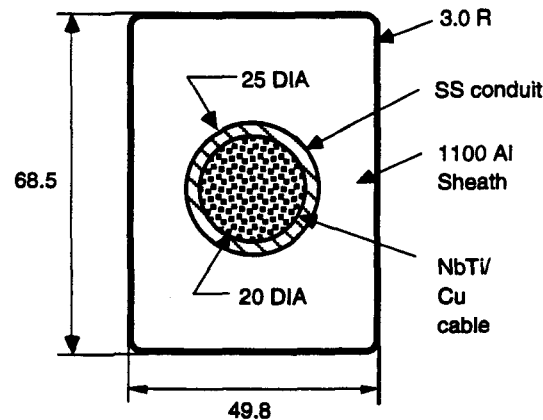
Cross section of the GEM Conductor. Dimensions are in mm.
